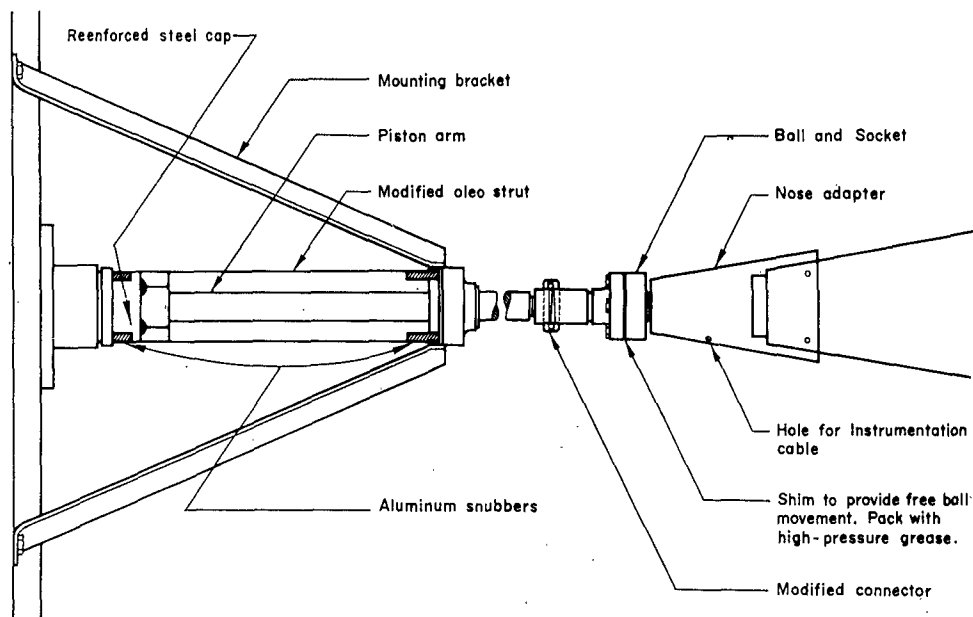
Thrust neutralizer assembly captive missile shock stand
